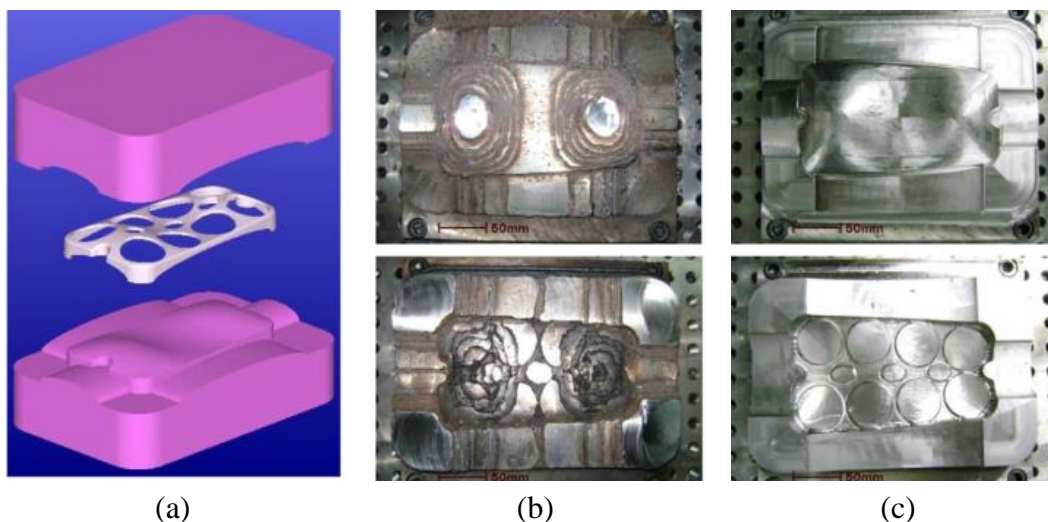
An injection mold manufactured using the 3-axis HLM, (a) CAD models of the part egg template and its injection molds, (b) near-net molds, (c) finished molds (Suryakumar et al. 2011).
